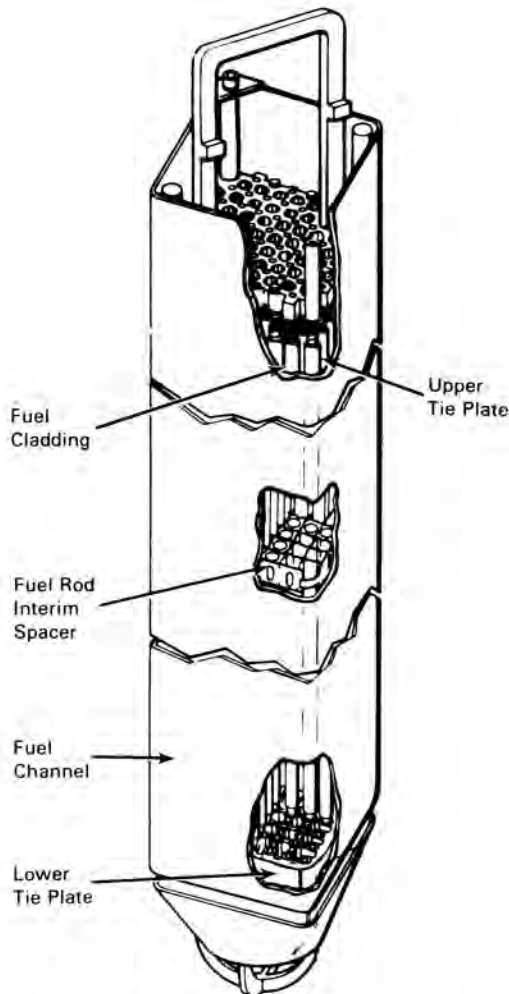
General Electric 8 x 8 PWR Fuel Assembly.
